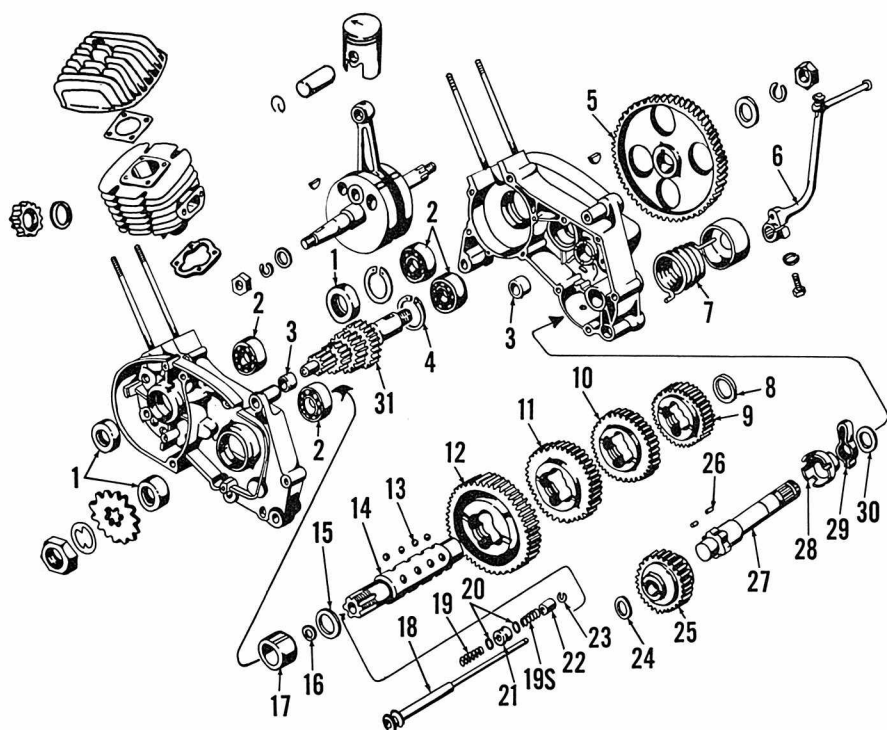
Exploded view of the crankcase and four speed transmission assembly. Refer to Fig. HK11 for five speed transmission.
